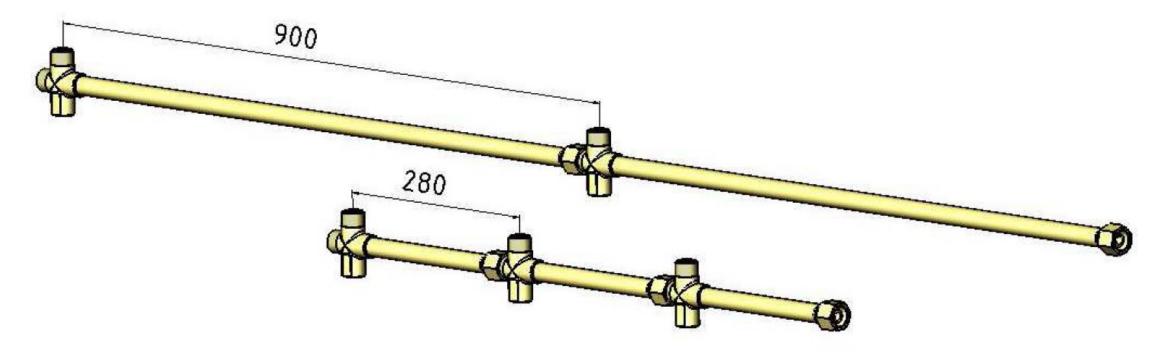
top: 2 x manifold with check valve, 1-fold – for bundle battery installations bottom: 3 x manifold with check valve, 1-fold – for cylinder battery installations
